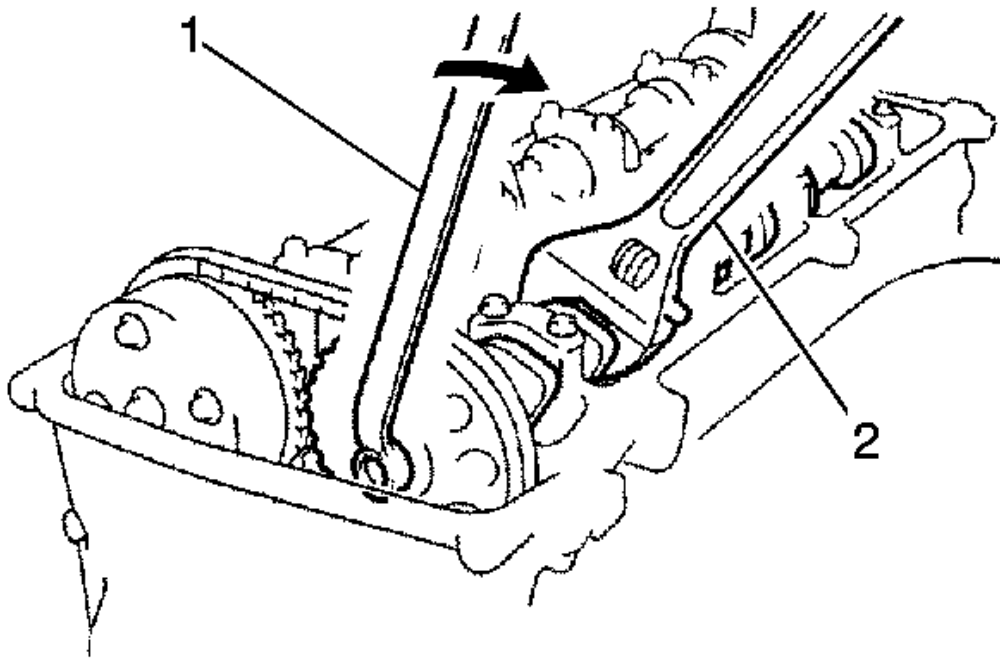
Tightening Camshaft Timing Sprocket Set Bolt
